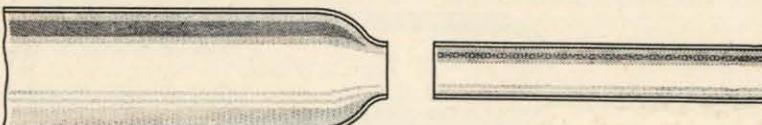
BUBBLE CRACKED OFF CLOSE TO ROUND END
